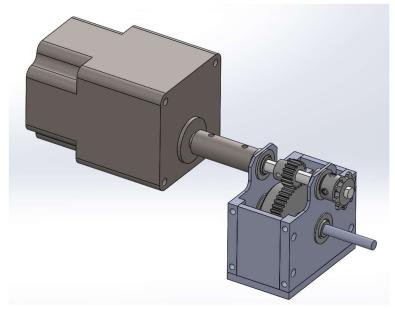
SolidWorks assembly of the gears with the stepper motor shaft.
